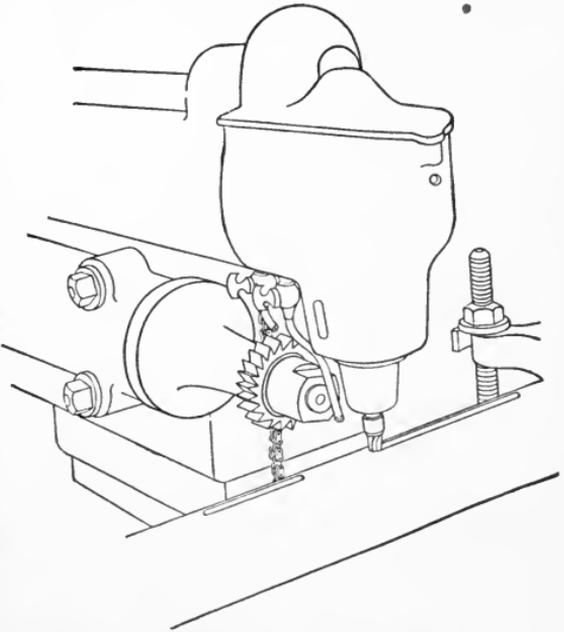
Splining Arrangement with End Mill in Vertical Head
